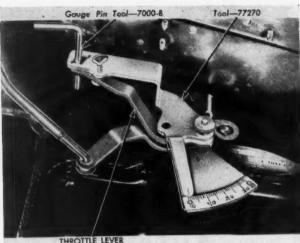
Protractor gage in position over the throttle lever shaft locating the large elongated hole.
